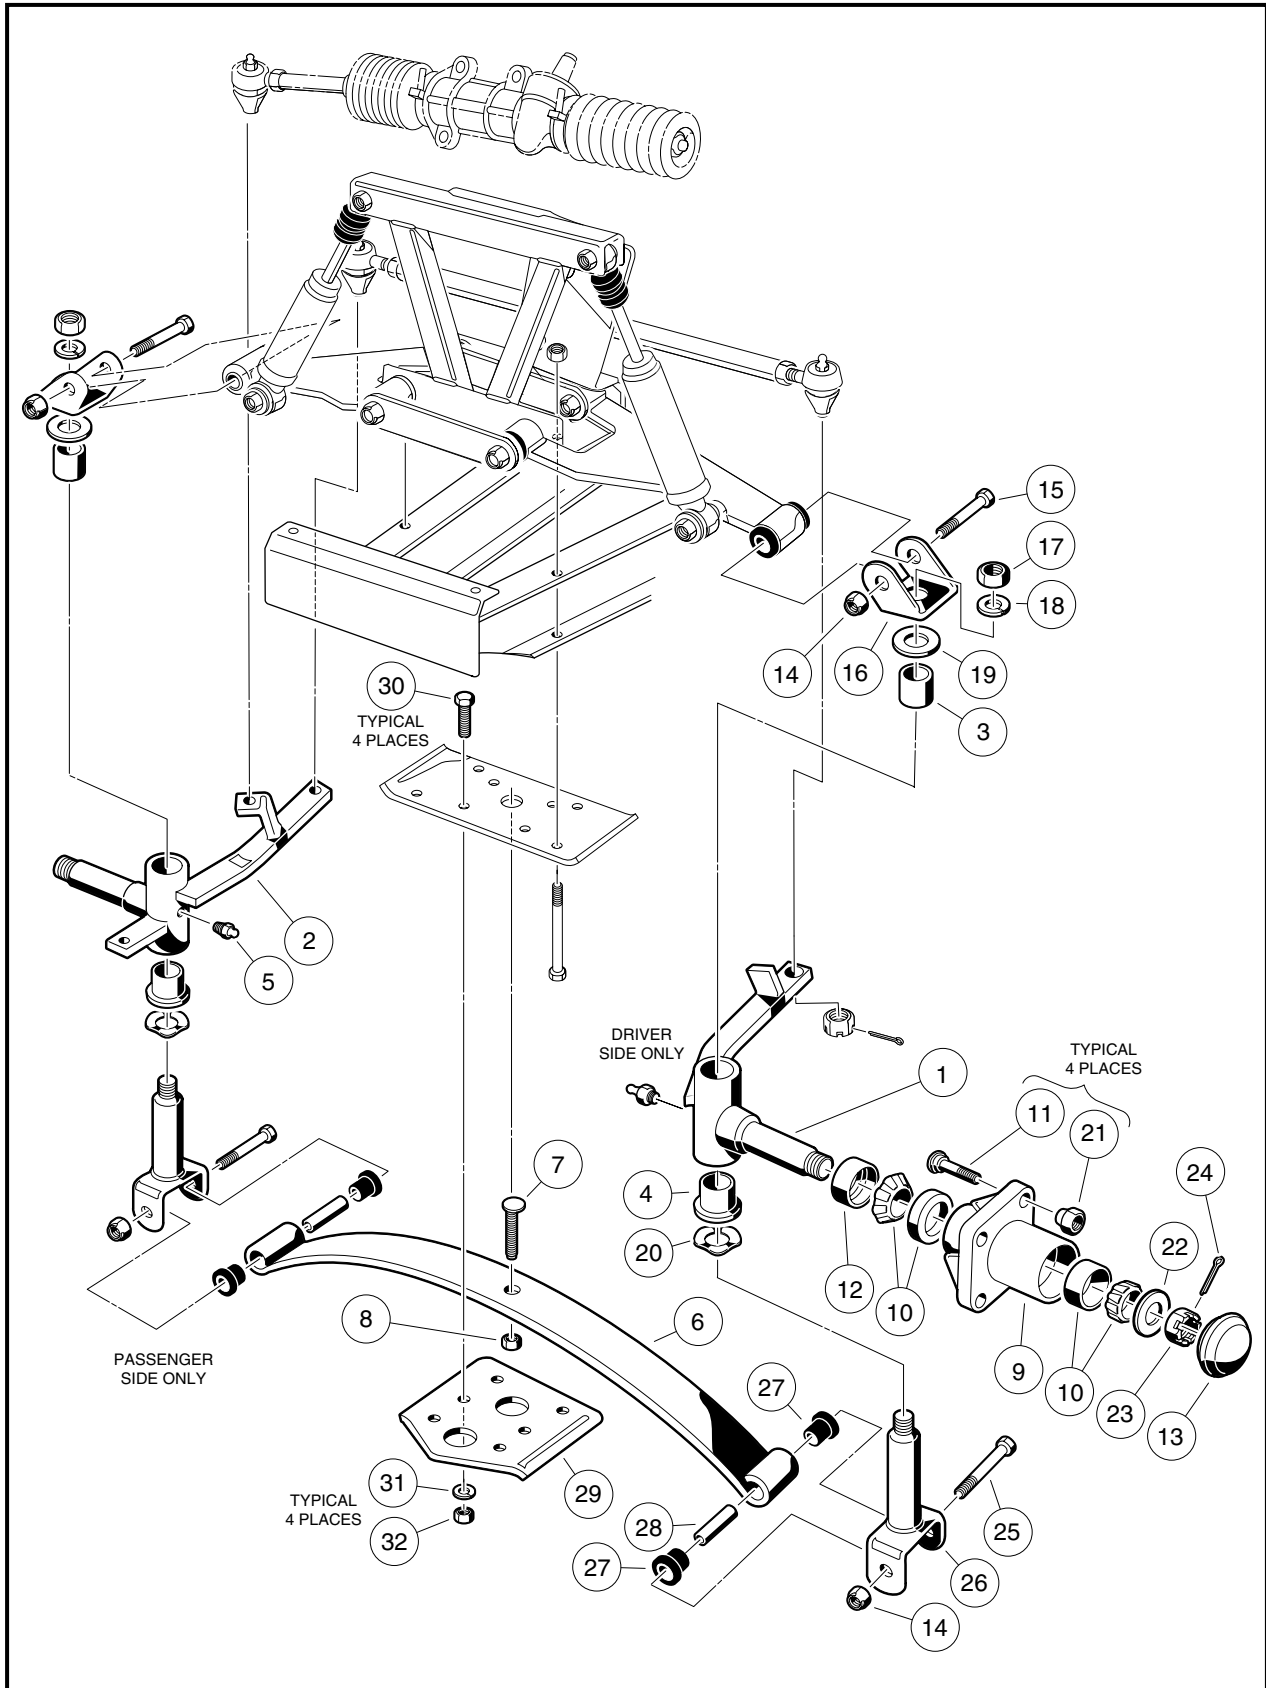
Two-Wheel Brake Vehicle - Lower Portion
